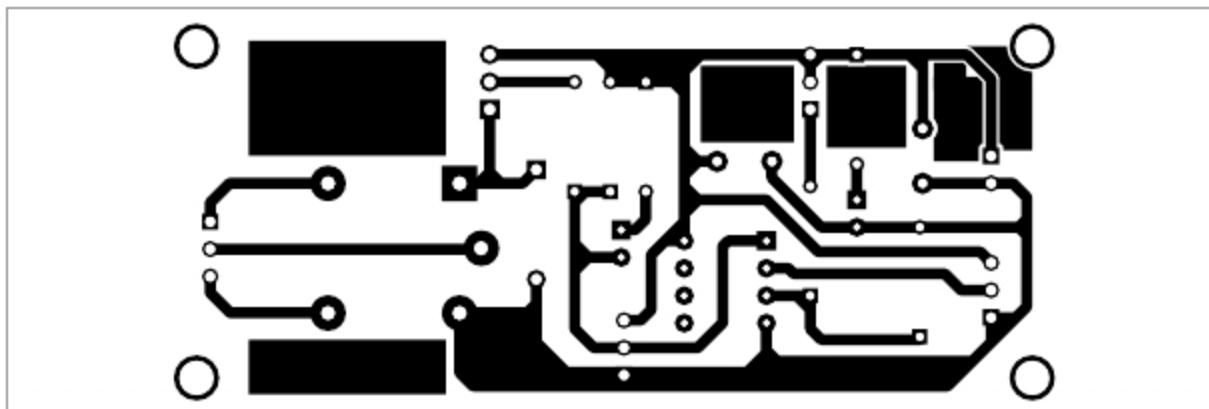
Actual-size PCB layout of overcurrent fault detector
